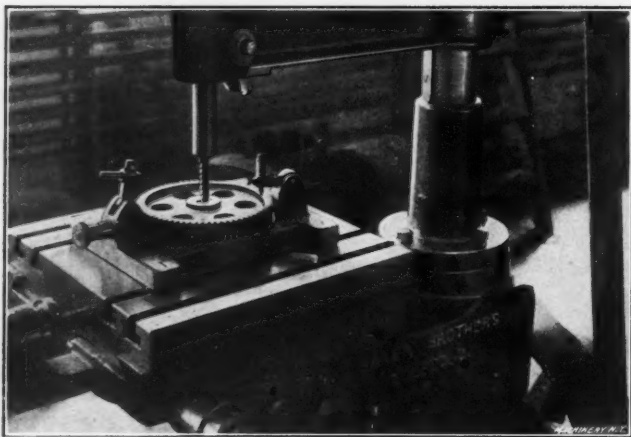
Showing Method in which Jig is used on the Keyseater for Marking the Gears
